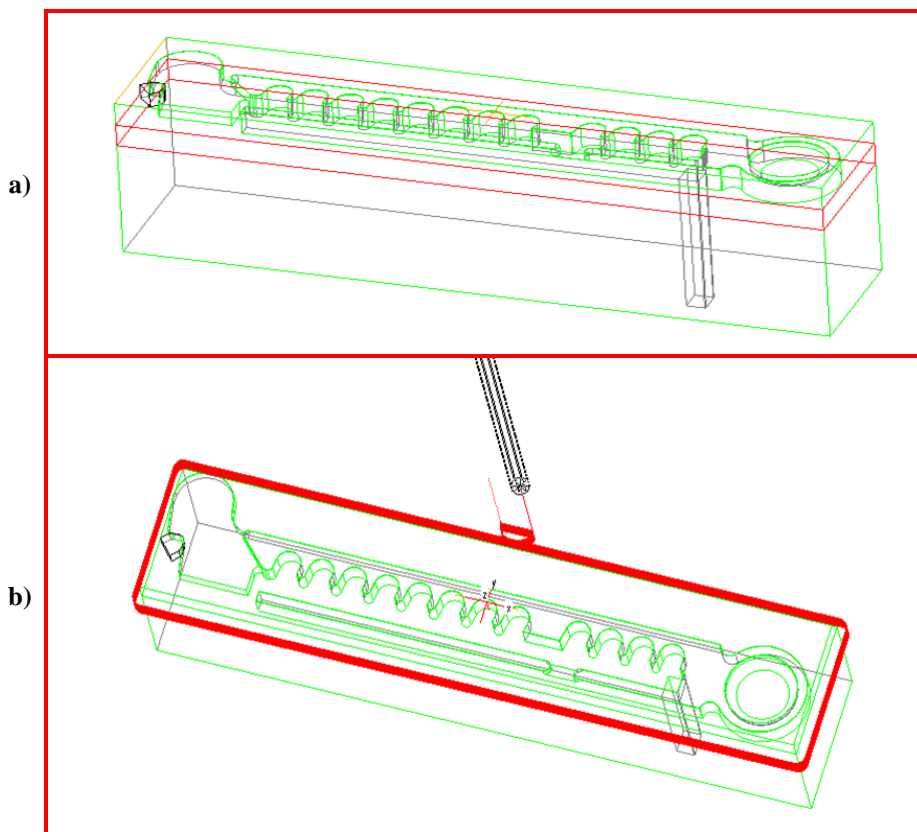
The simulation of machining of the base surfaces: a – a choice of profile of the model; b – the trajectory of the cutting tool for the third machining step.
